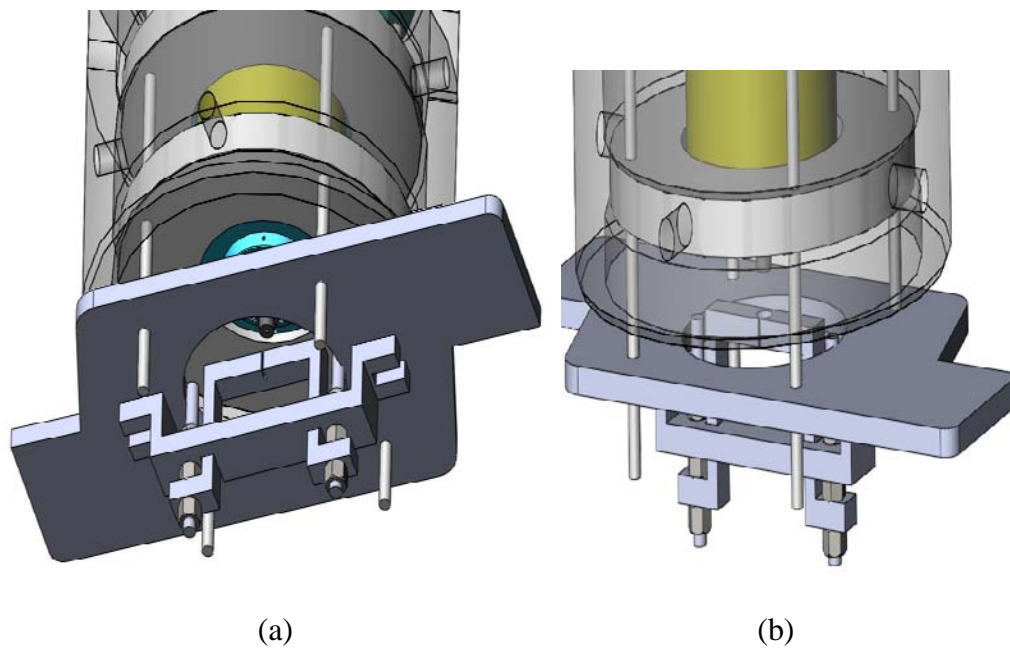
Axial sensor holder mounted on the locator plate beneath the cylinder assembly
